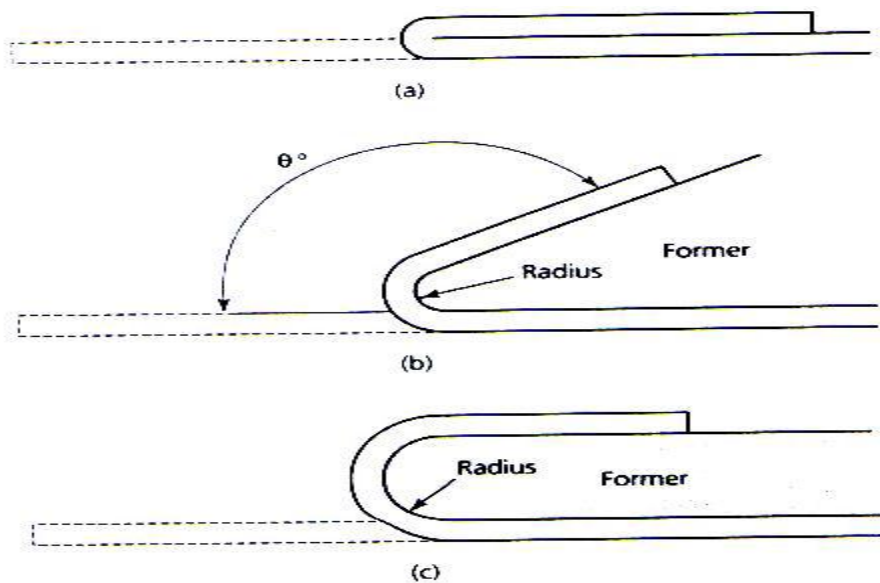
Bend tests: (a) close bend; (b) angle bend; (c) 180 C bend
